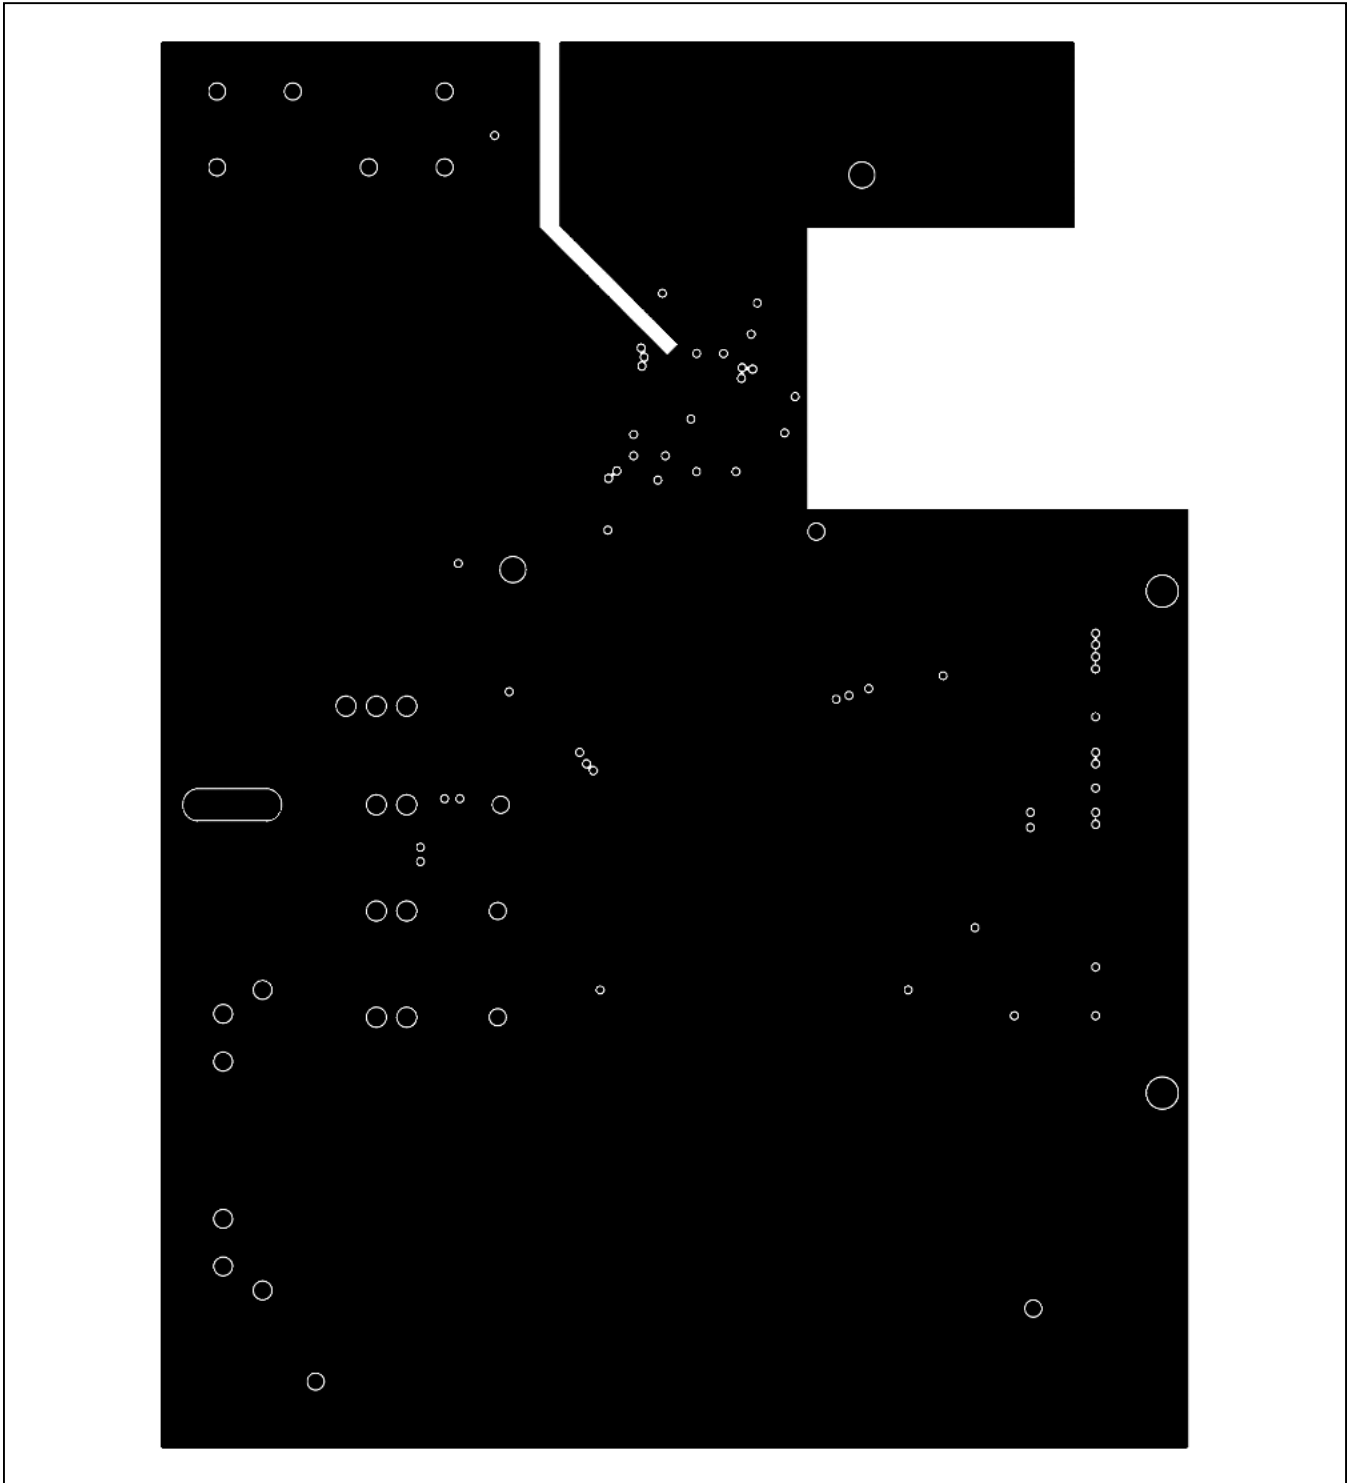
MAX3710 EV Kit PCB Layout—Ground Plane
